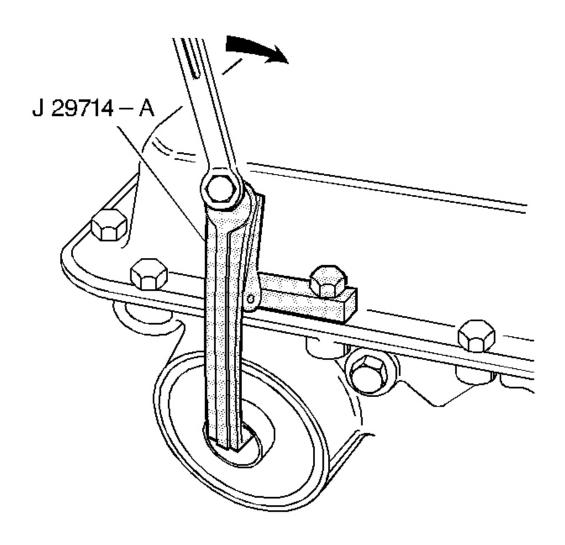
View Of J 29714-A Special Tool Courtesy of GENERAL MOTORS CORP.
